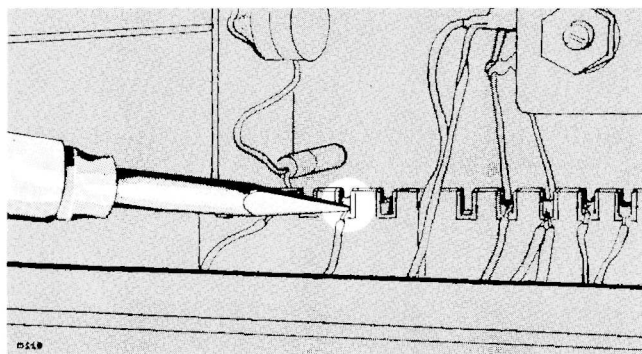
Correct method of applying heat in soldering to a ceramic strip.
